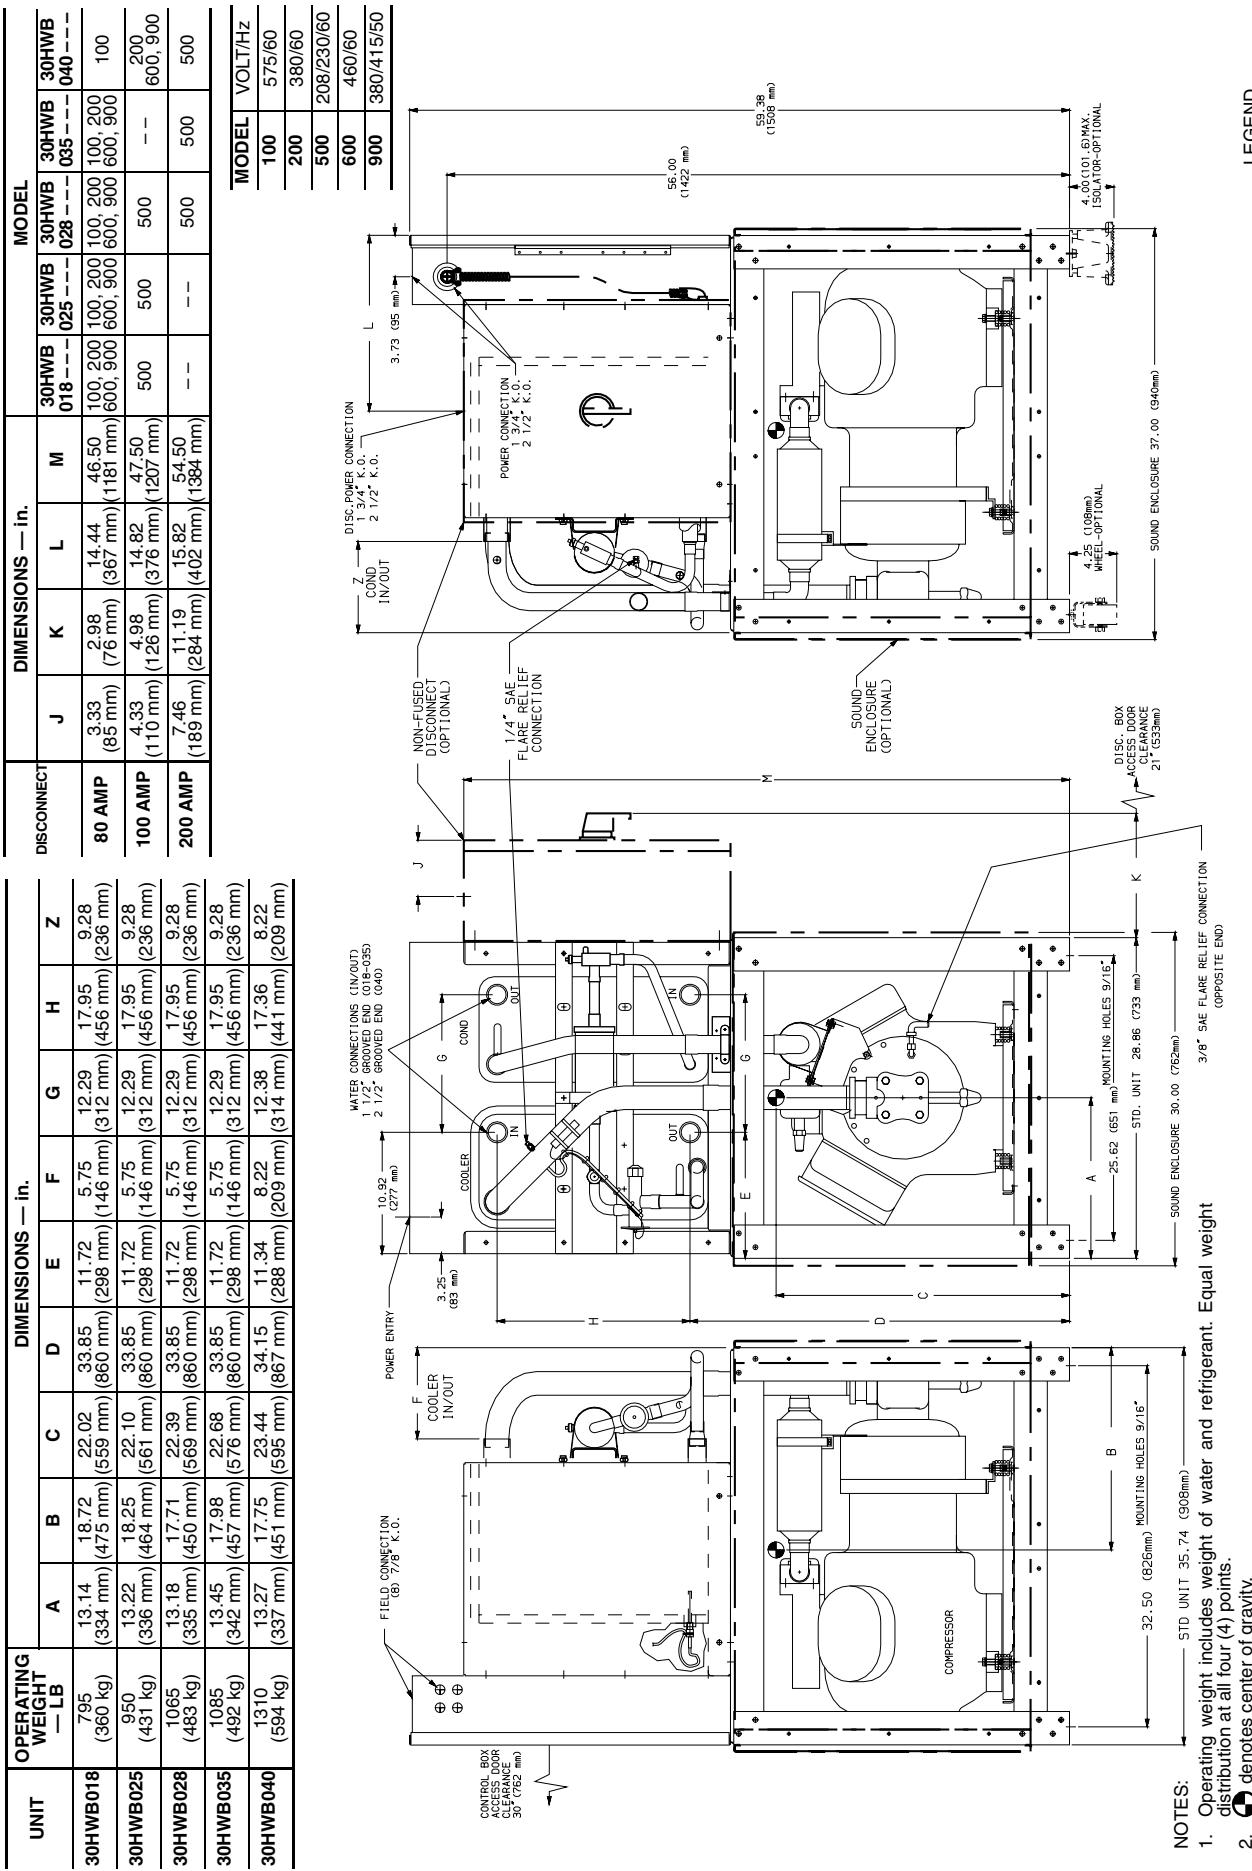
Dimensions, 30HWB018-040 (Fluid-Cooled)
